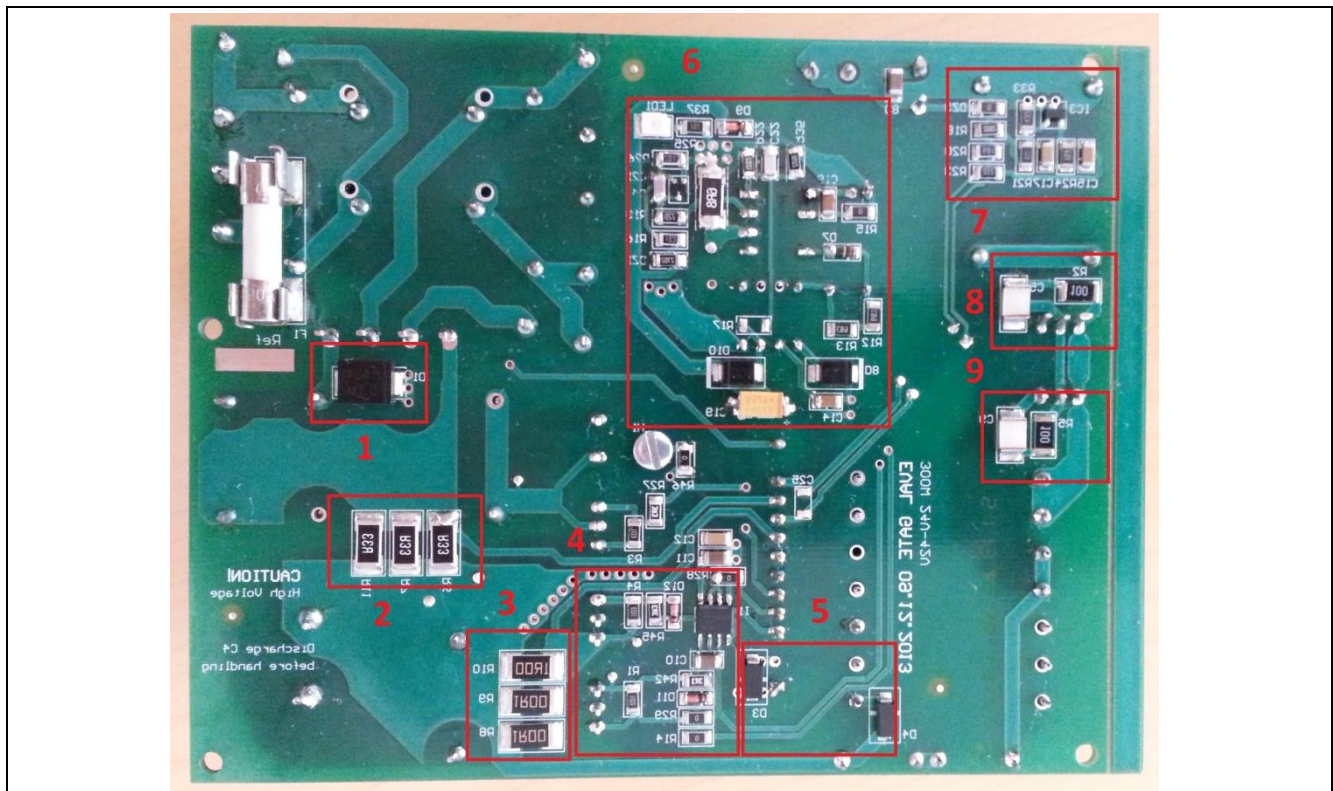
Bottom view of 300 W SMPS Evaluation board (flipped)
